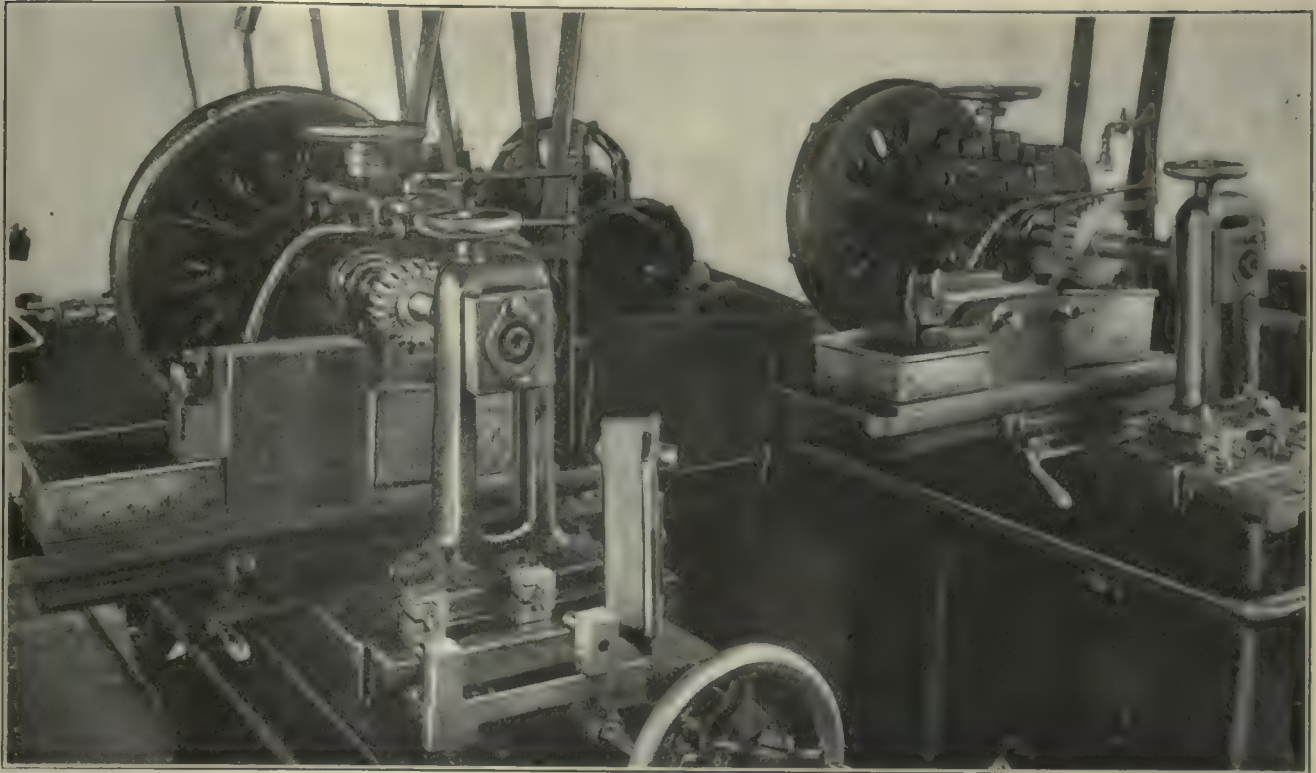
MILLING THE SIDES OF THE RECEIVER
